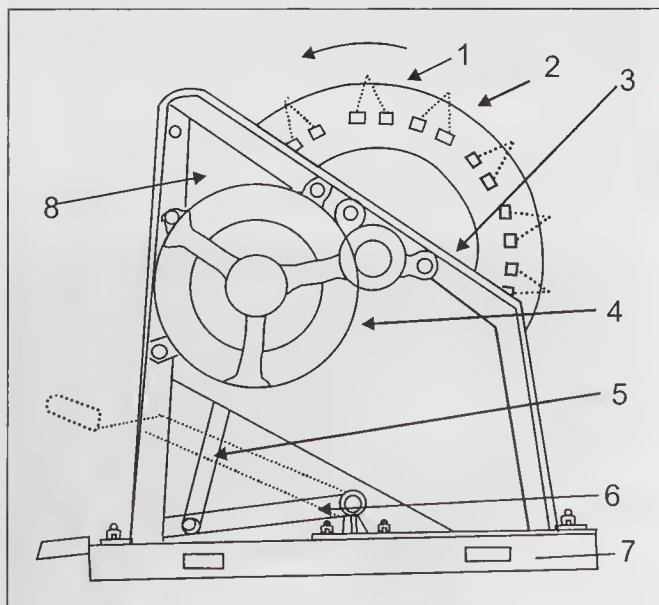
Pedal operated paddy thresher. 1, Wire loop tooth; 2, Drum; 3, Frame; 4, Gear Drive cover; 5, connecting lever; 6, Pedal; 7, Base frame; and 8. Side sheet.
